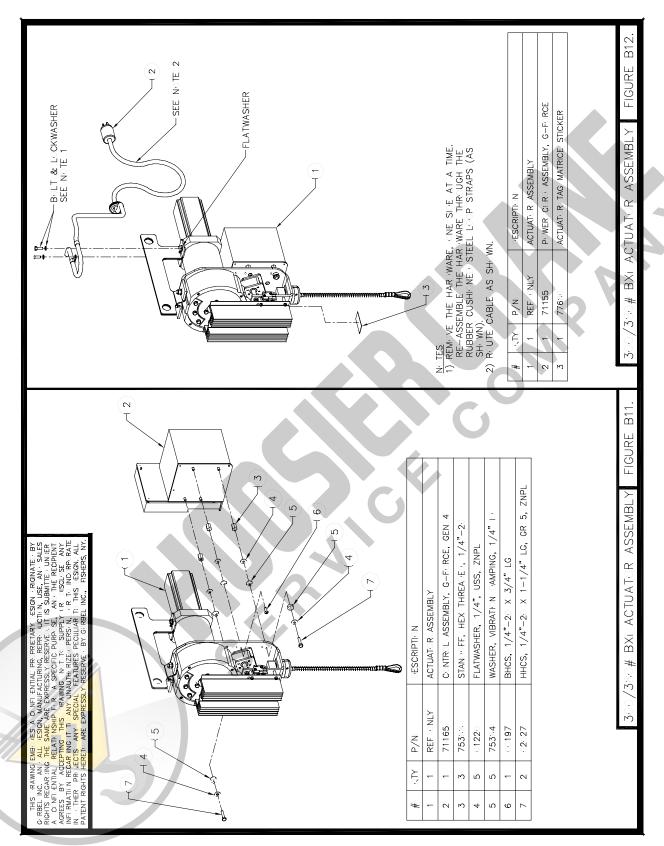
(bottom) & Figure B12 (top). 300/380# BXi Actuator Assembly.
